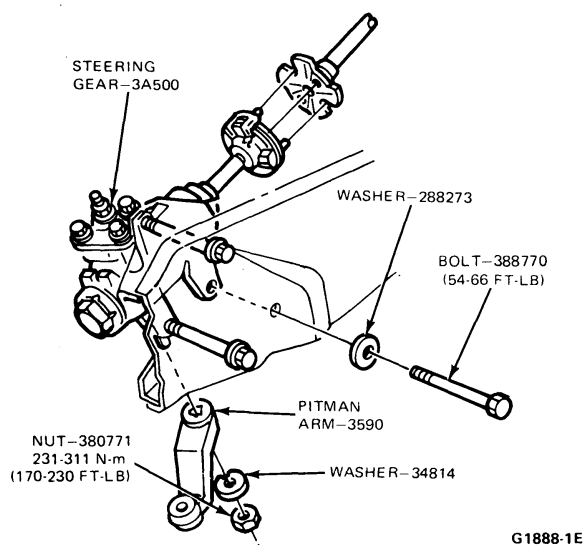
Steering Gear Installation—F-100, 250 and 350 (4x2), Bronco
